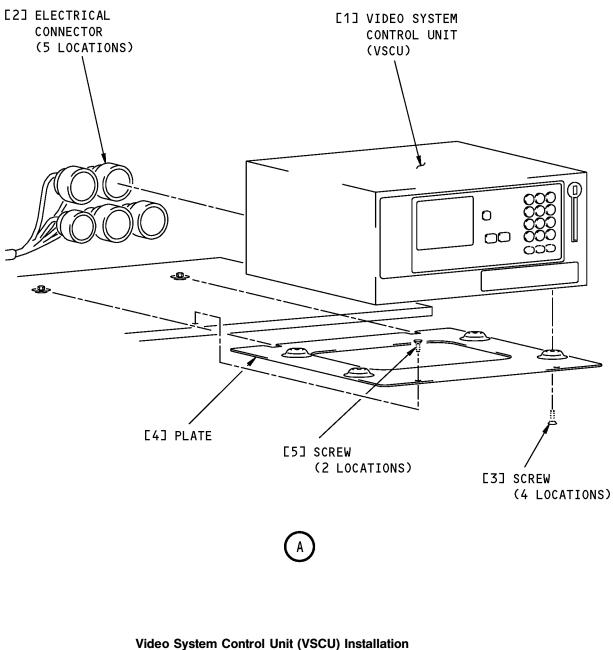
(Sheet 3 of 3)/23-32-02-990-801-001
